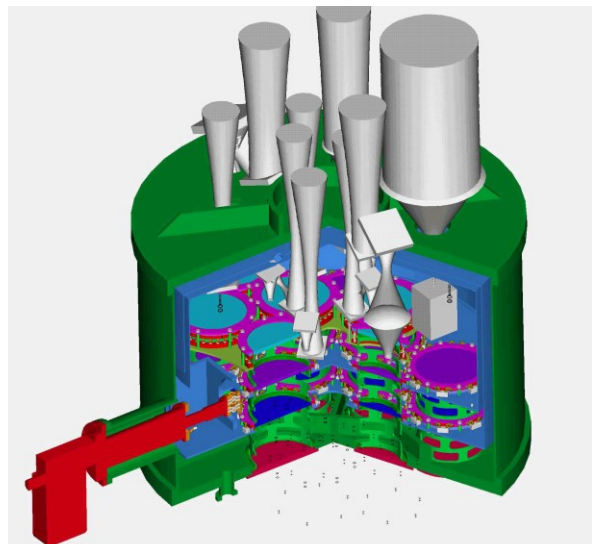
The ALMA front end assembly. Up to 10 receivers are accommodated in a single vacuum chamber with a single 3-stage GM cryocooler (red) achieving cooling of 33W at 68K, 8W at 13.7K, and 1W at 4.2K.
